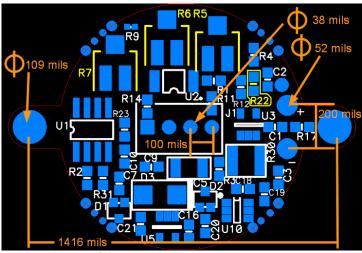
View of the Standard OEM PCB potentiometer side
